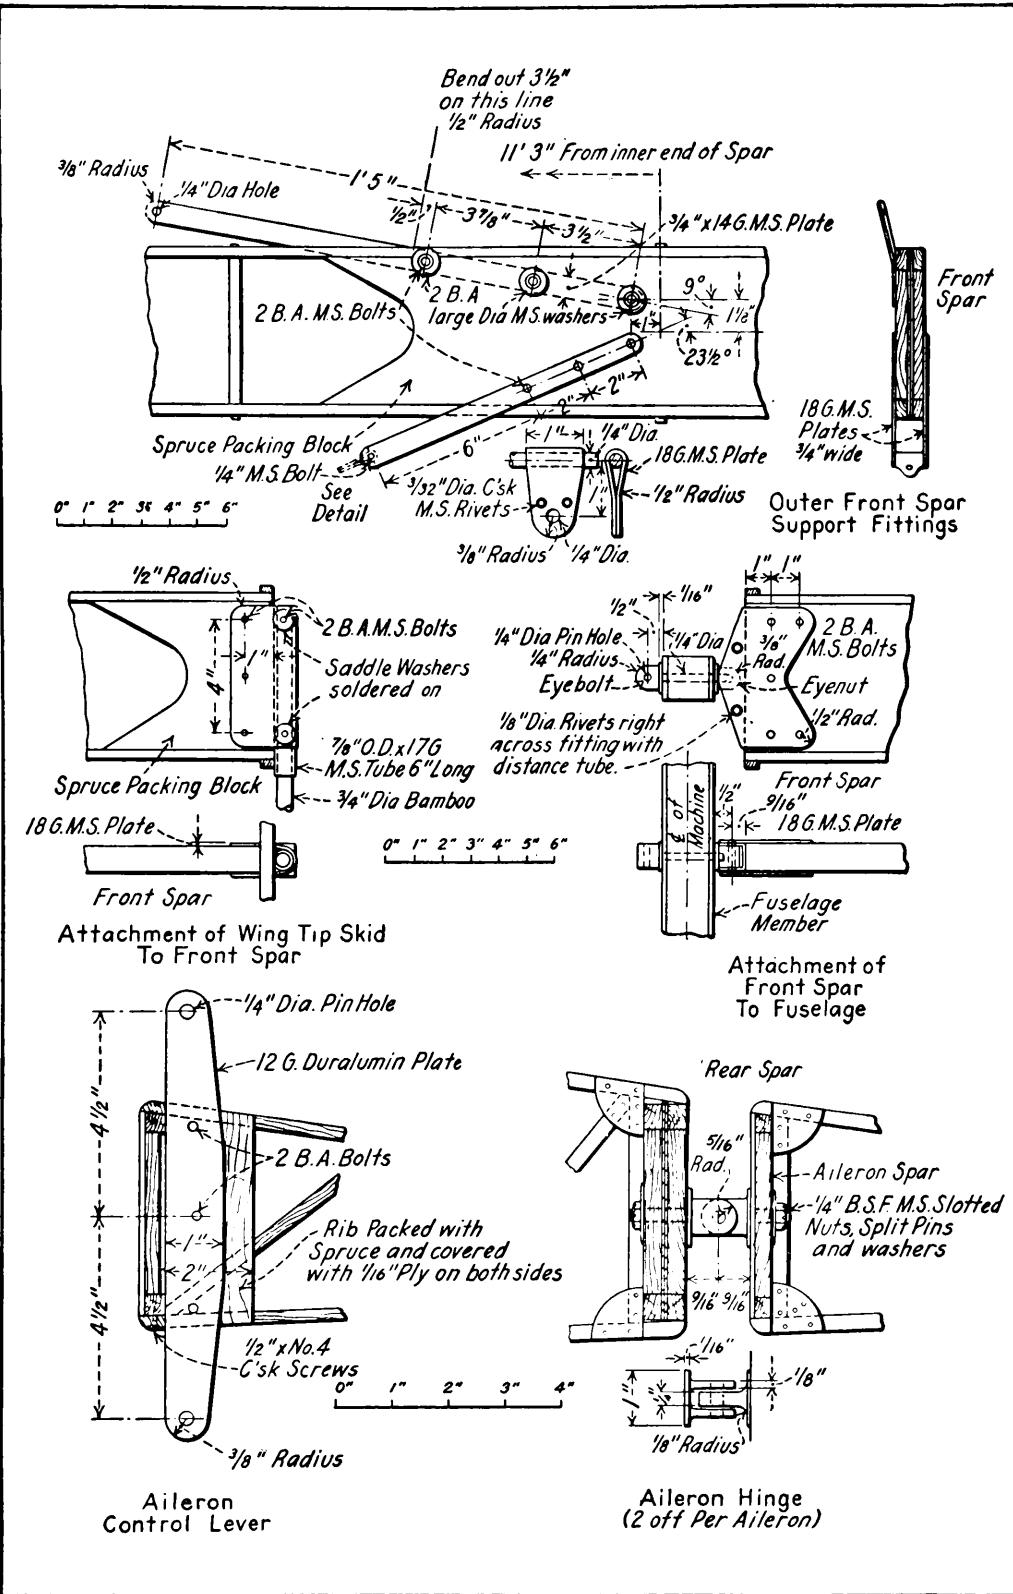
Detailed Drawings Showing Construction of Wing Bracing and Attachment Fittings of the Dickson Training Glider and the Method of Attaching Aileron Control Horn and Hinges.
